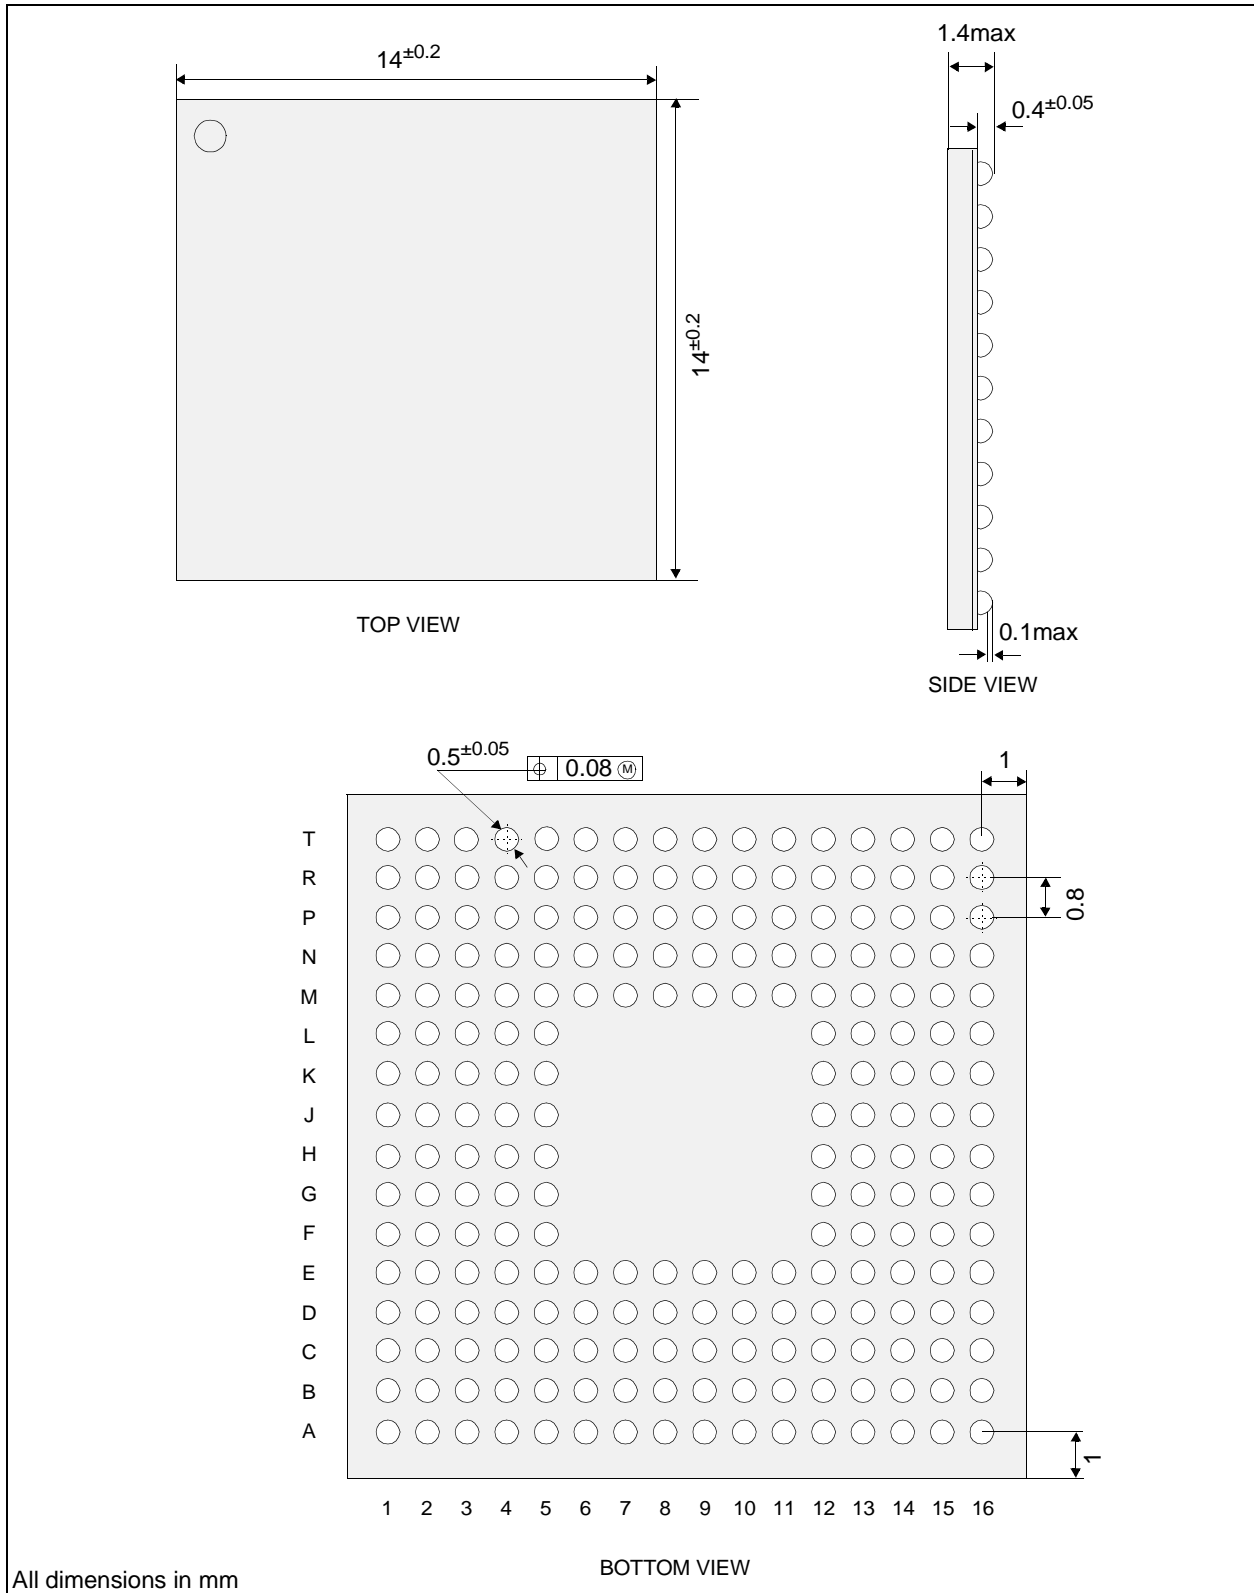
Mechanical Drawing 220-pin PFBGA
